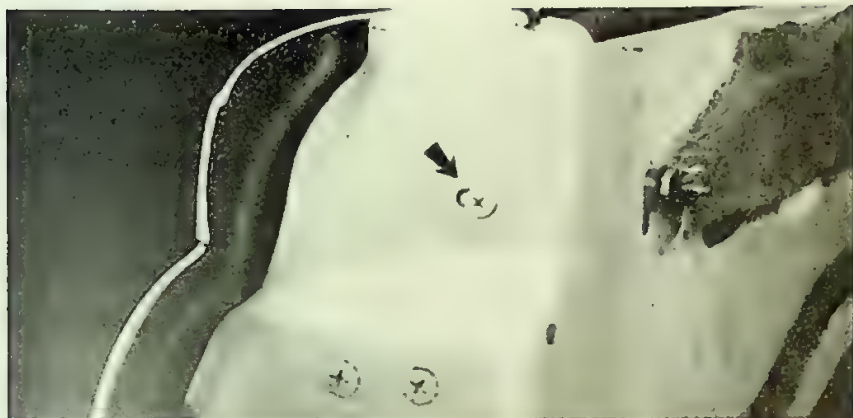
Adjusting Screw on Front Face of Inner Panel Controls Door Window Side Adjustment.
